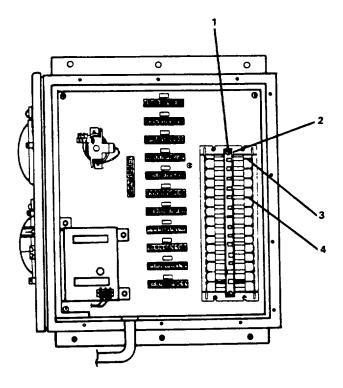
Receiver Panel, Power Supply and Master Alarm Module.
